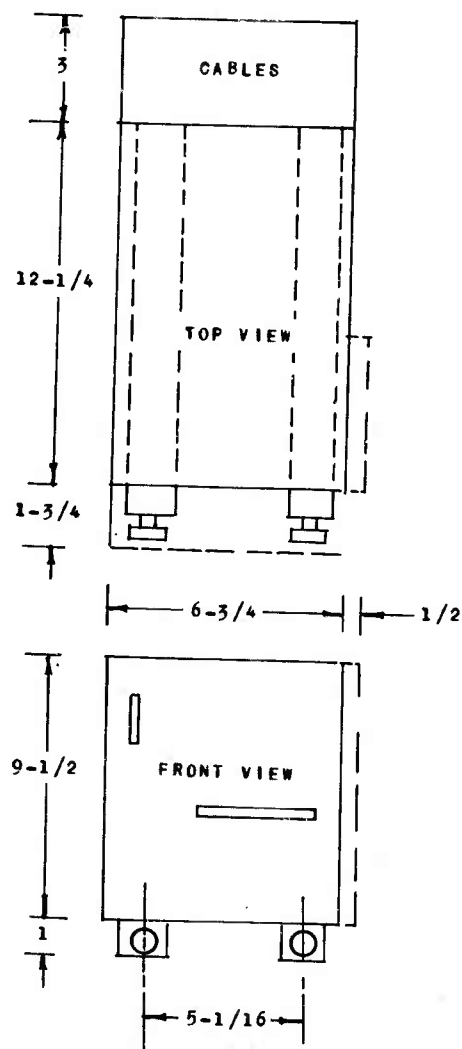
Clearance dimensions for OR (bomber, fighter).
